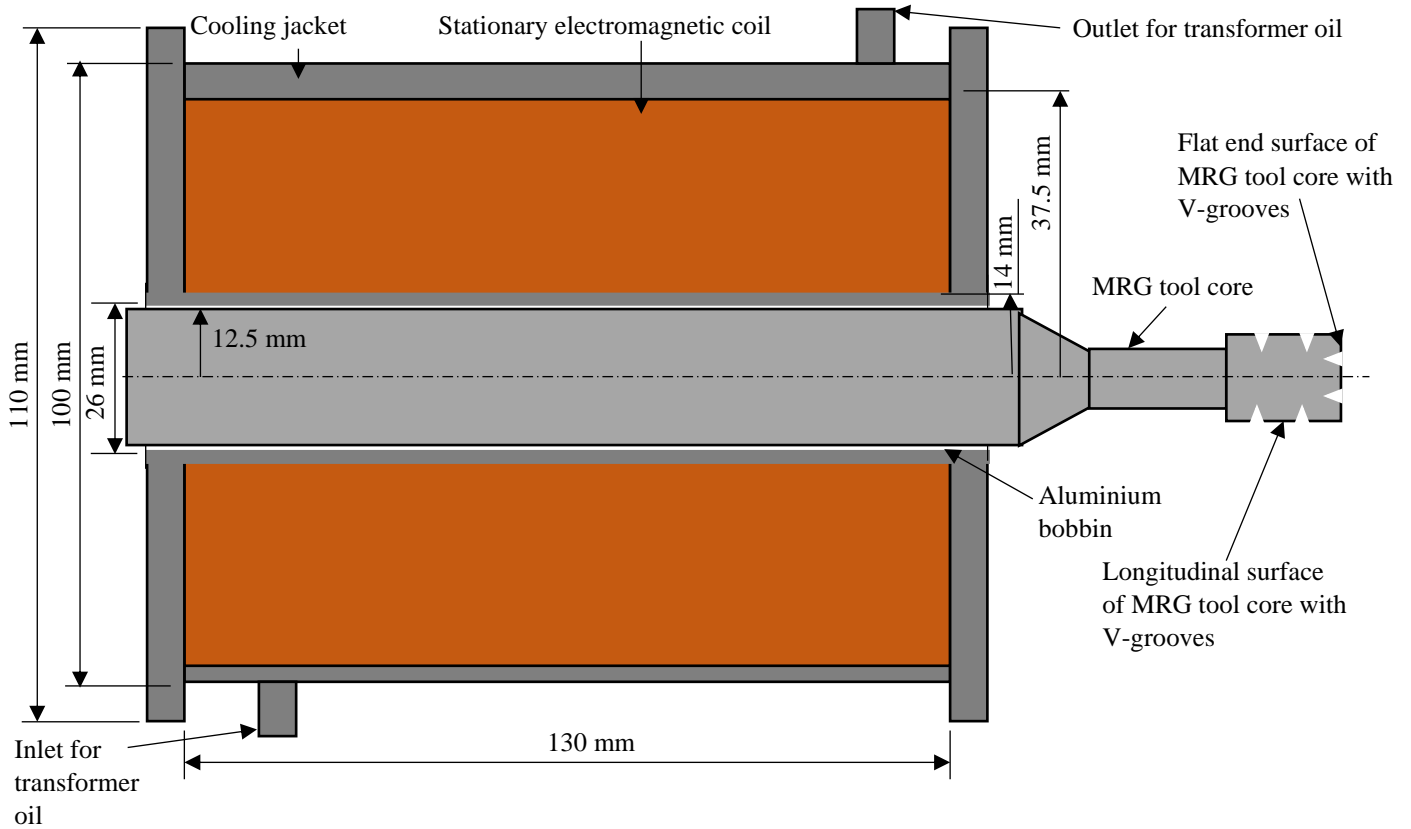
Final geometrical dimensions of the electromagnetic coil over the aluminium bobbin along with the rotating MRG tool core having V-grooves on its finishing surfaces.
